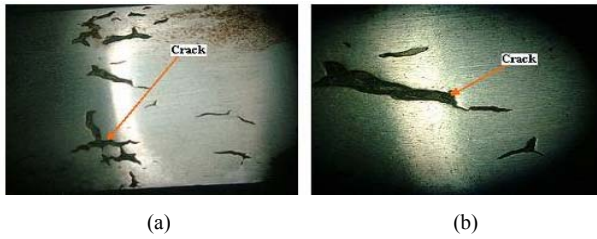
Magnified view of the surface crack obtained in the failed base tube.
